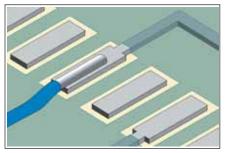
Acceptable* Wire soldered parallel to conductor, contact, SMT pad.
